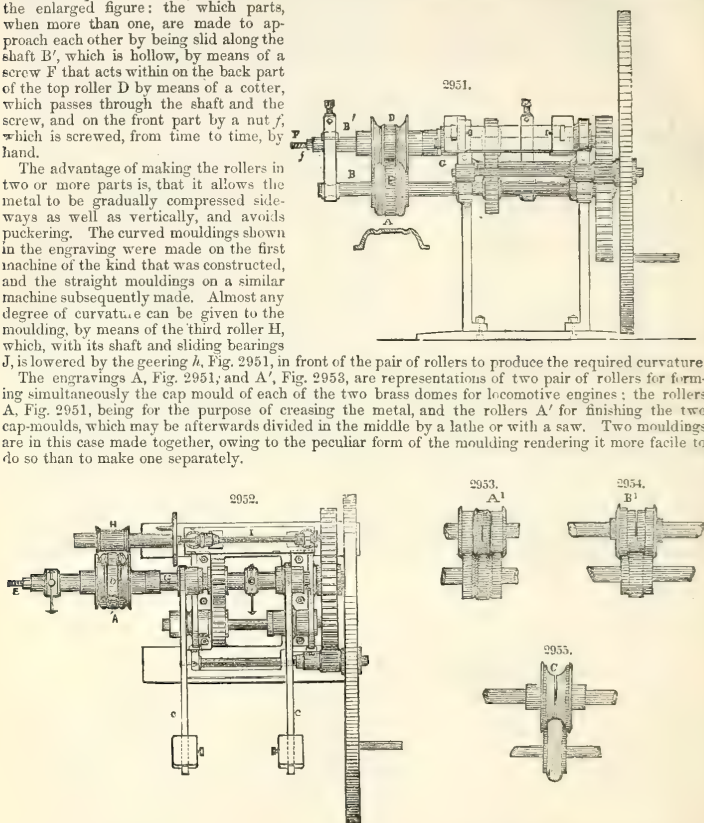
and 2954 show two pair of rollers for forming the "astragal," to which the upper and lower plates of the chimney of a locomotive are riveted; the rollers B' B' are used in the order the drawings are lettered.
